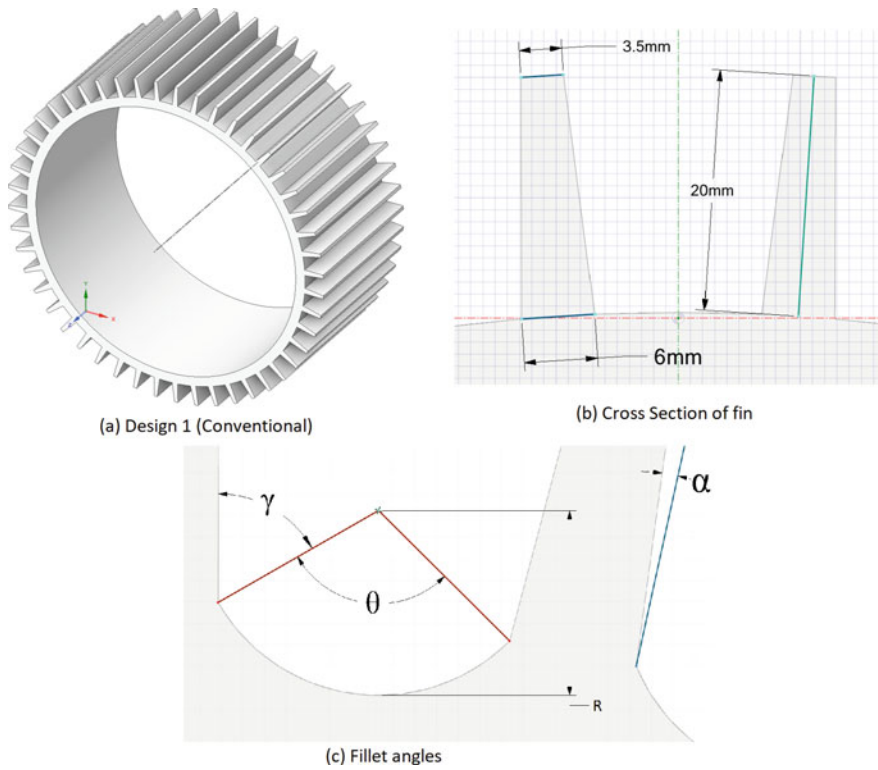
a Geometry of design 1, b cross-section of fin, and c fillet angles
